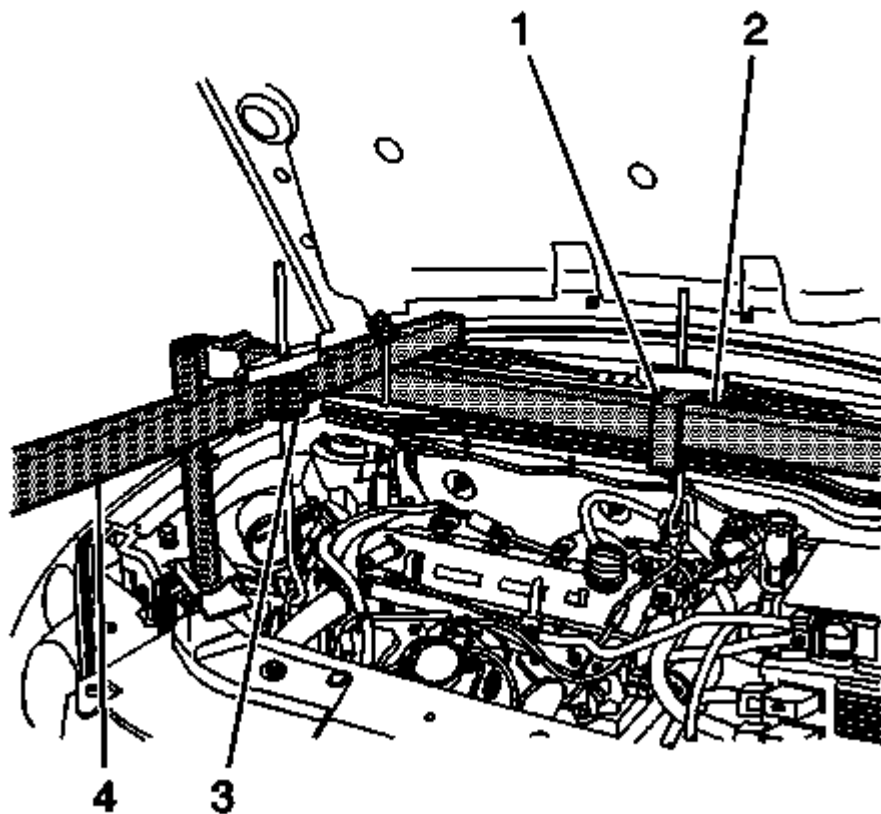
Identifying Engine Support Fixture & Cross Bracket
